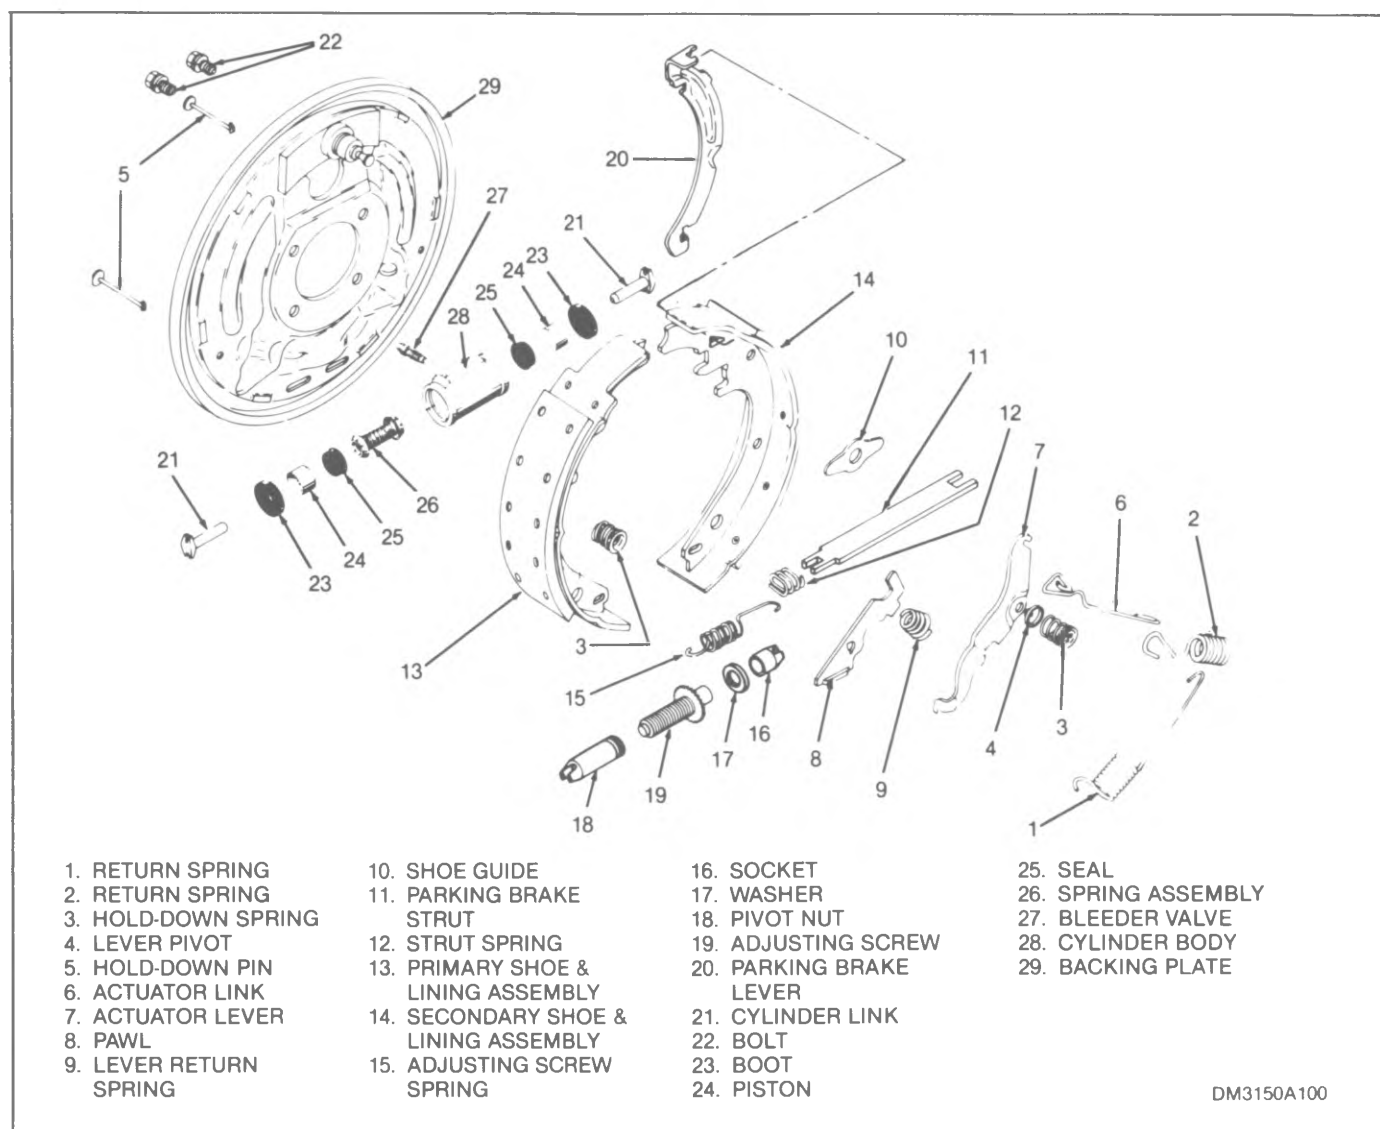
Conventional Drum Brake With Apply Actuated Adjuster
